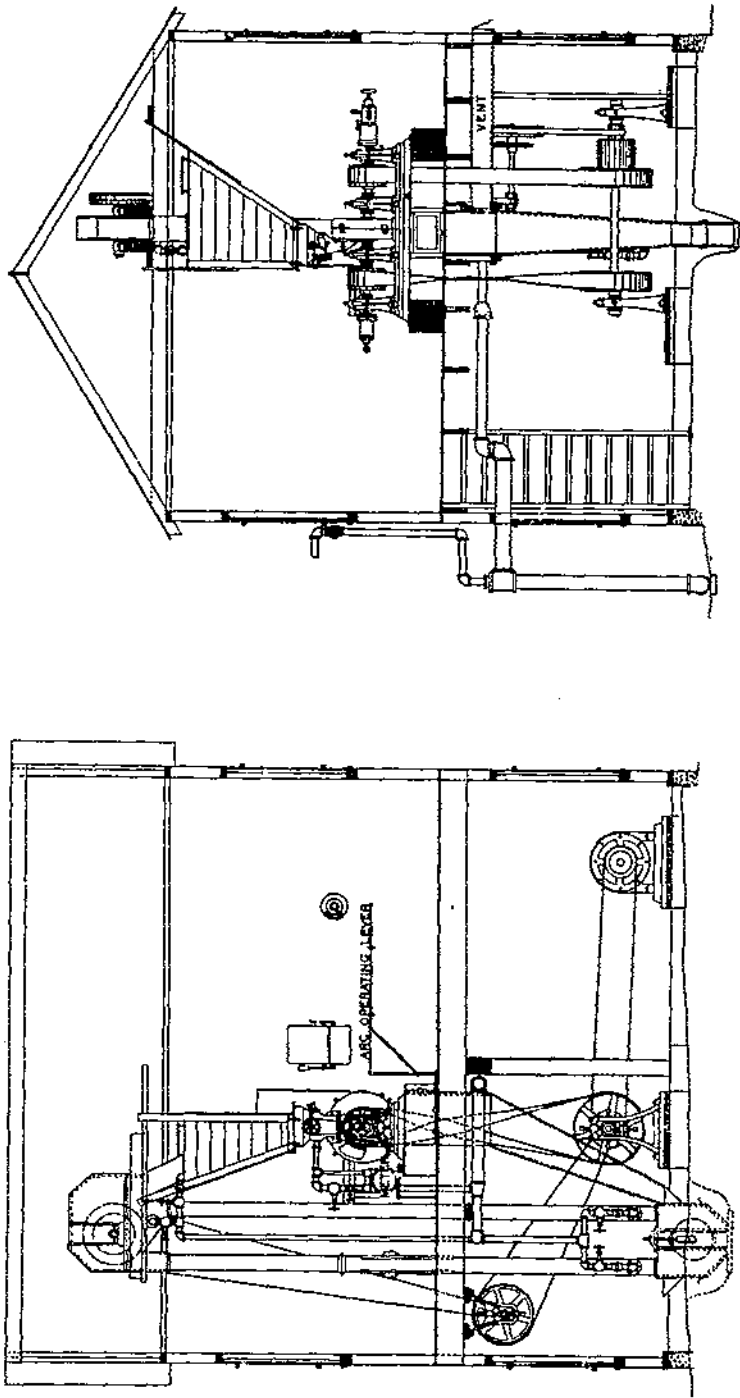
Experimental mill using inert gas for the prevention of dust explosions
